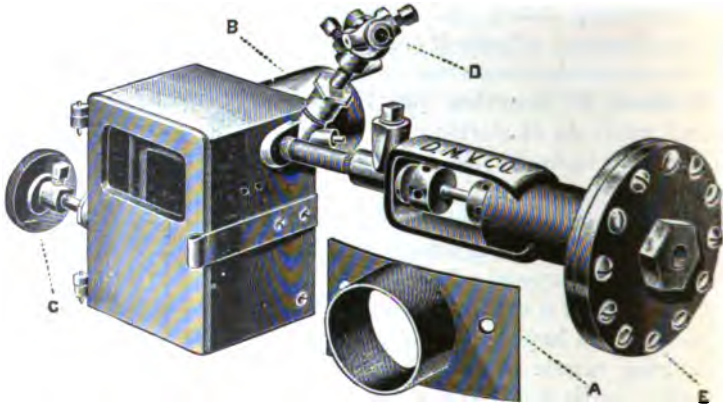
Starter Box and Diaphragm Regulator of the "Dayton" Burner. The parts are: A, segmental plate and collar at opening of the mixing tube; B, thimble on starter box containing supply pipe to the mixing tube and burner; C, starting valve; D, knuckle joint for connecting control valve to driver's seat; E, head-piece of the diaphragm regulator.
